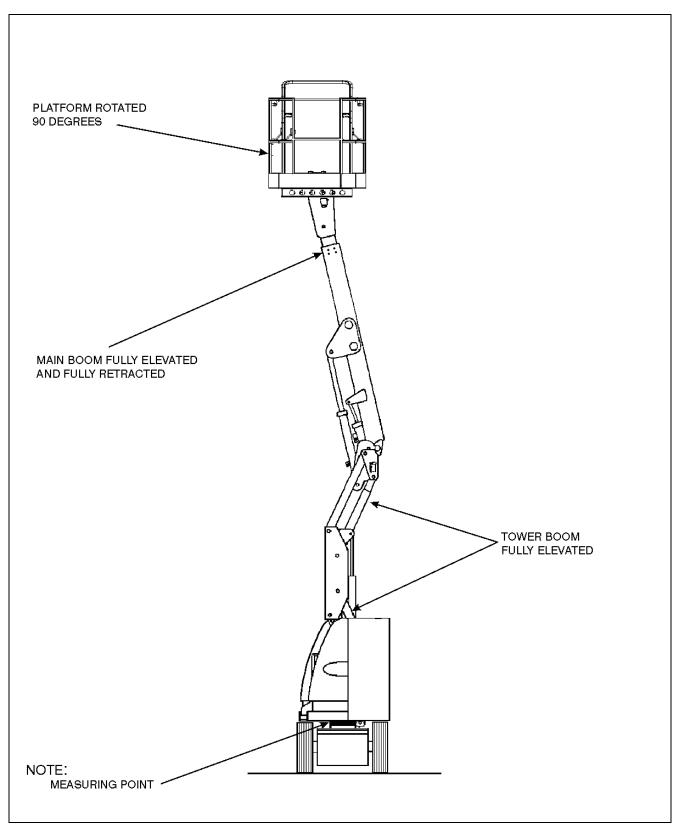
Swing Bearing Tolerance Boom Placement.
